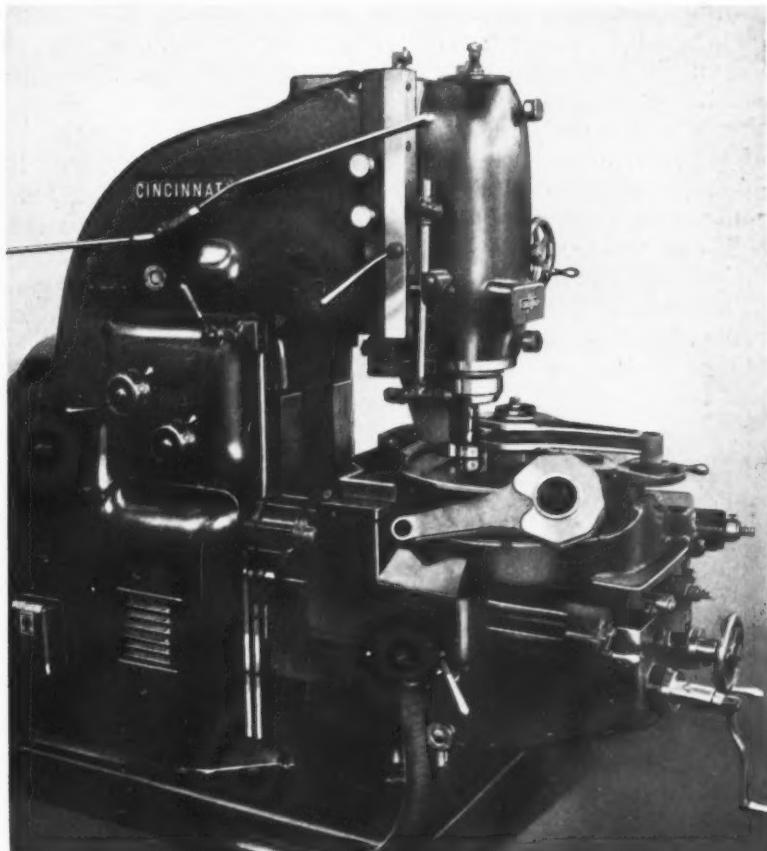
Rotary Profile Milling of Master Rods, Using a Special Rotary Milling Table
